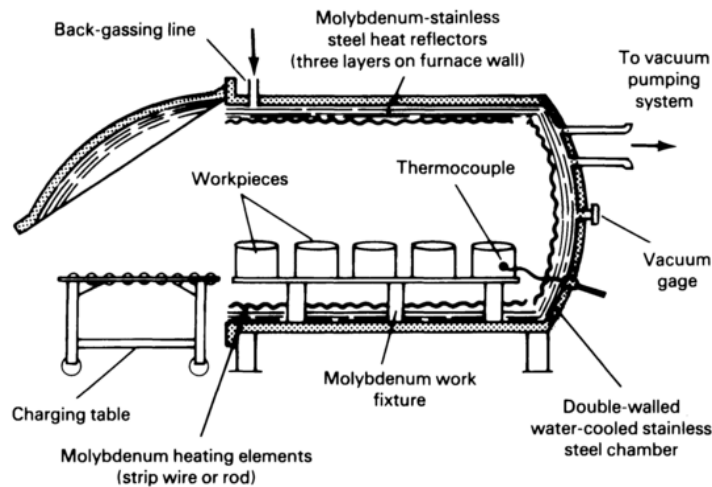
Schematic of a cold wall furnace with side-loading, double-wall insulation, and a water-cooling system.<sup>7</sup>
